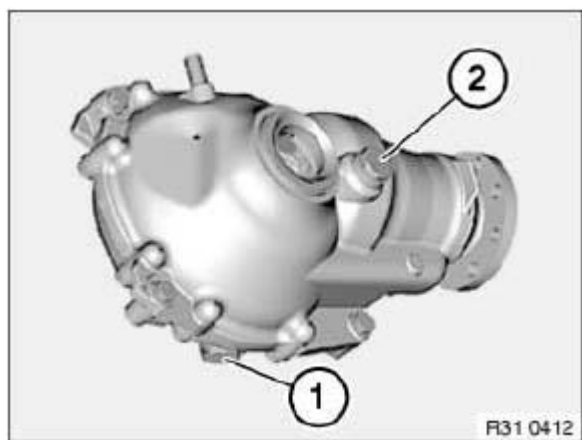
Identifying Oil Filler Plug And Oil Drain Plug
